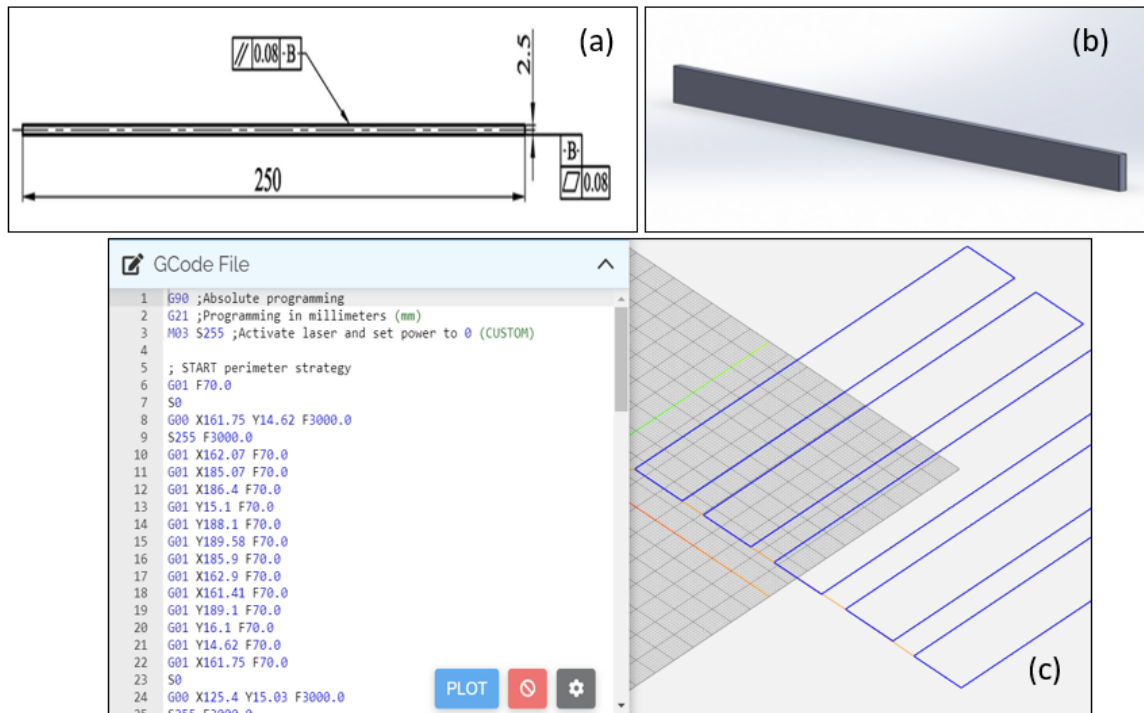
(a) ASTM D3039/D3039M-14 tensile specimens' dimension, (b) SolidWorks design for preparing the G-code, and (c) G-code for LOM print.
